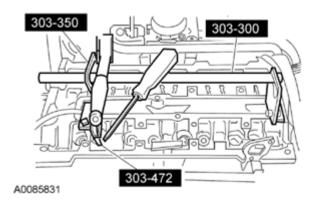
Removing Valve Spring Using Valve Spring Compressors Courtesy of FORD MOTOR CO.
